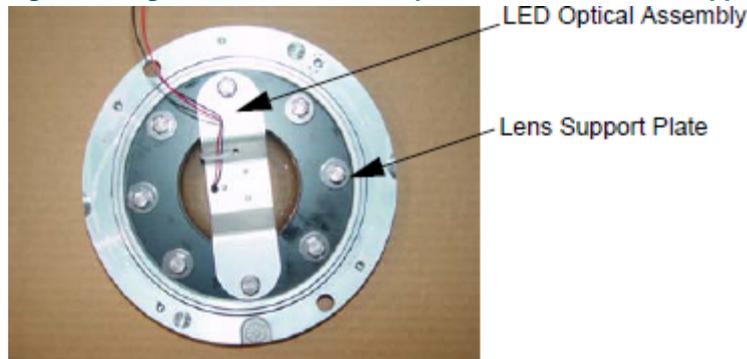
Figure 6-7 Remove Lens Flat Gasket
